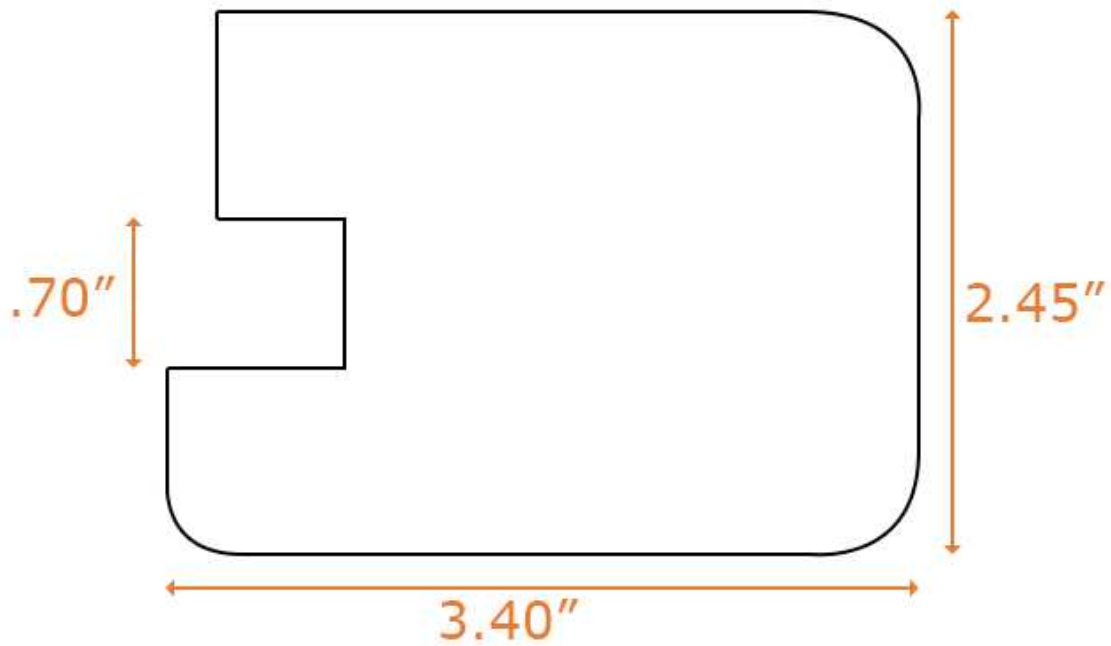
BeagleBone CANBus Cape Dimensions Drawing
